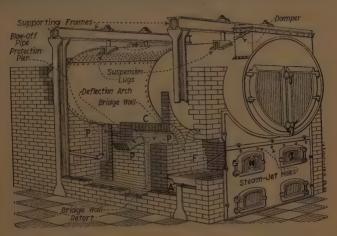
Chicago setting for a horizontal return tubular boiler.
